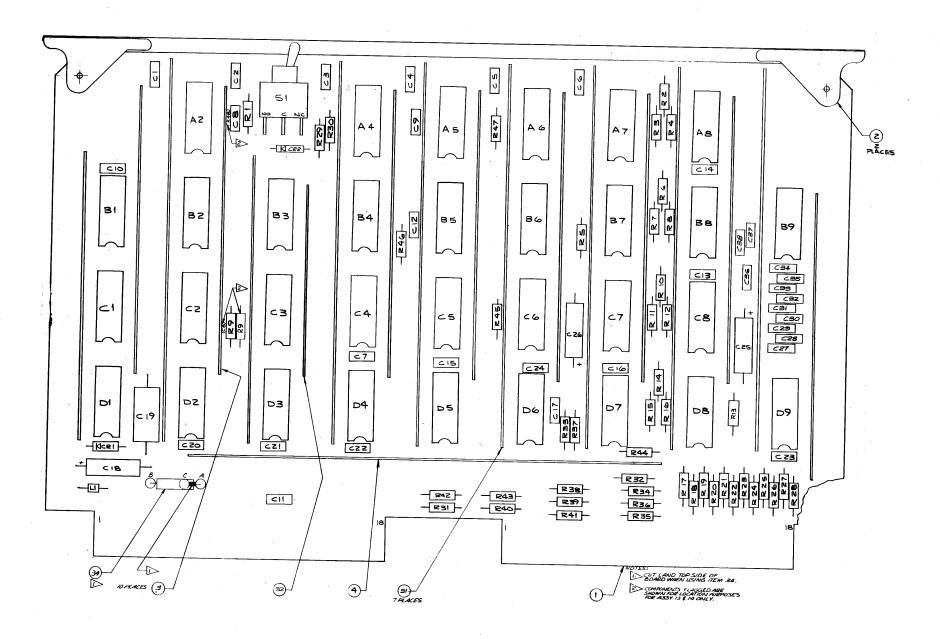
Assembly Diagram, Control Card (Dwg. No. 1040619)
